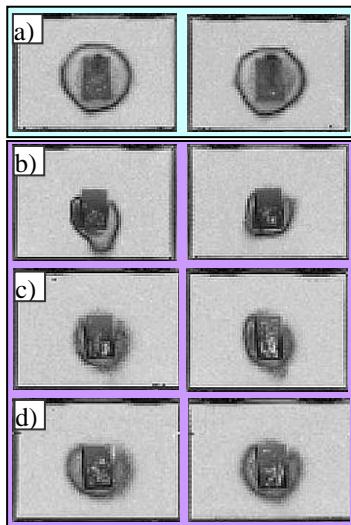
Through scan x-ray image of die attach samples: a) Standard Pb-Sn solder wire was used, and Zn-Al-Ge solder wire was used at b) 370°C, c) 380°C, & d) 390°C
